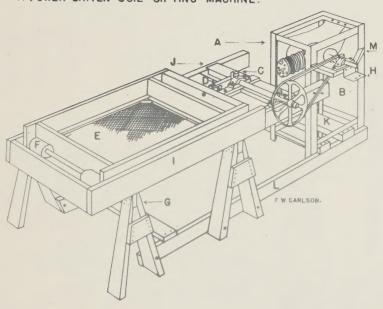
Power-driven soil-sifting machine. A, Utility gasoline motor; B, bolt for attaching the motor frame to the sifter frame; C, adjustable crank with 1-1/2" to 4" stroke; D, hardwood connecting rod; E, shaker screen and frame; F, rollers; G, horses; H, platform for spray-gun compressor (when used for spraying); I, guide frame for sifter carriage; J, stationary base for sifter; K, cross pieces under engine frame; L, leg rests and motor support; M, extension-shaft frame.
